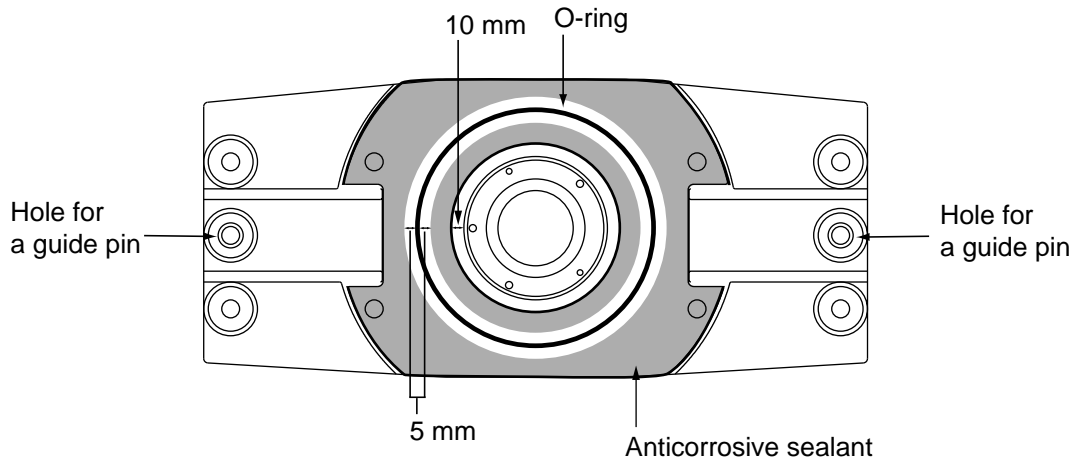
Coating the waveguide flange with anticorrosive sealant
